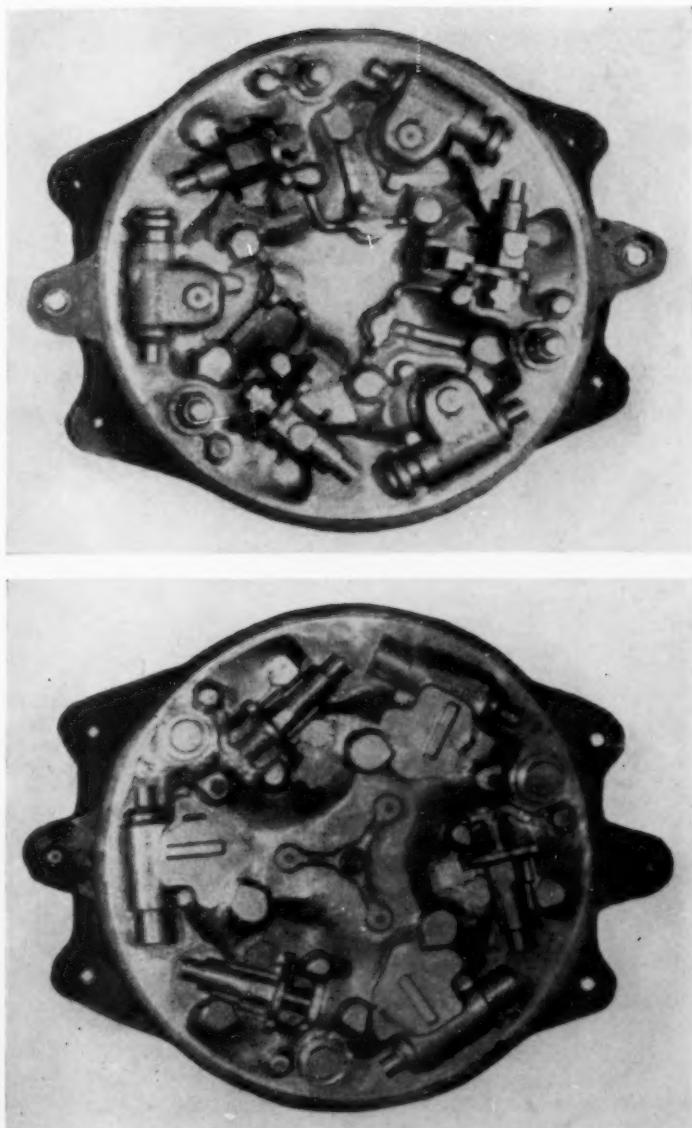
STEERING GEAR ASSEMBLY CONSISTING OF THREE HOUSINGS, THREE FLANGES AND THREE ADJUSTING NUTS, TOTALING NINE CASTINGS. YIELD FROM THIS COMPOSITE EQUIPMENT WAS 55.8 PER CENT.
